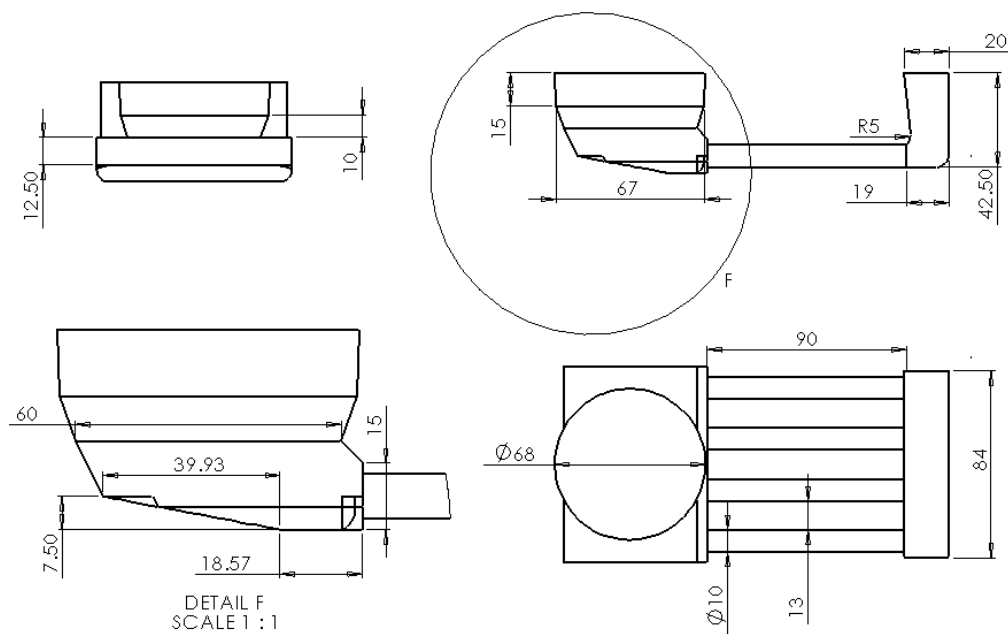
CAD drawing, showing critical dimensions of mould cavity (pattern) used in the static mould design.
